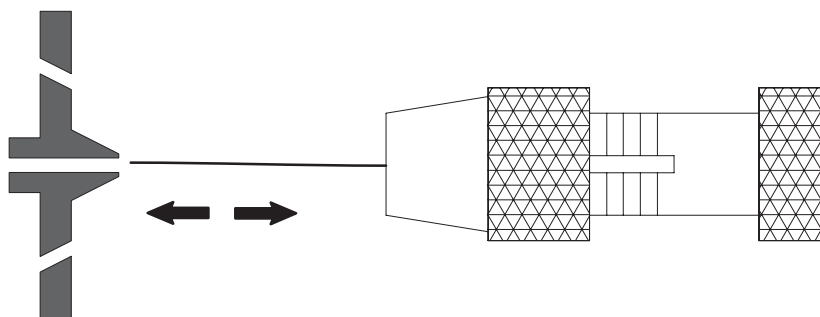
Correct direction to insert a pin-type probe into a nozzle (CF nozzle disk shown)
